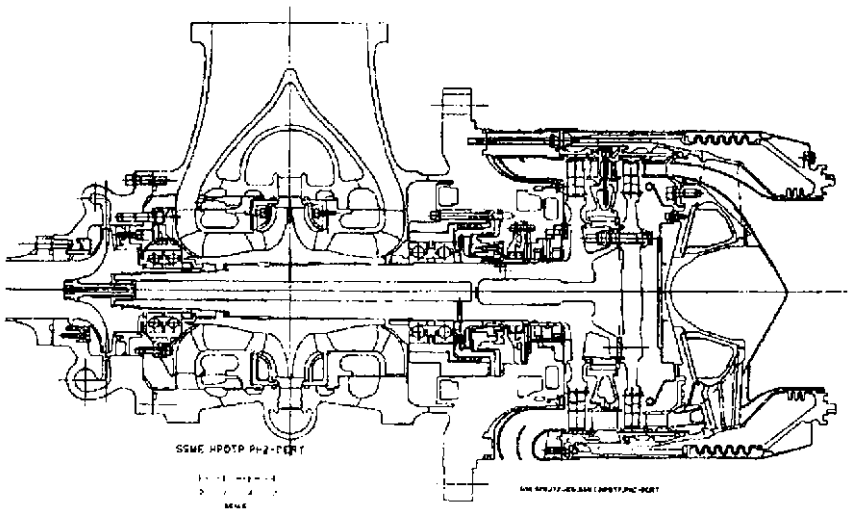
Cross-section of SSME high-pressure oxygen turbopump (Courtesy of The Boeing company)
